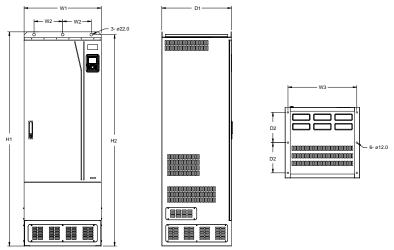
Floor installation diagram of inverters of 660 V, 400 to 630 kW
